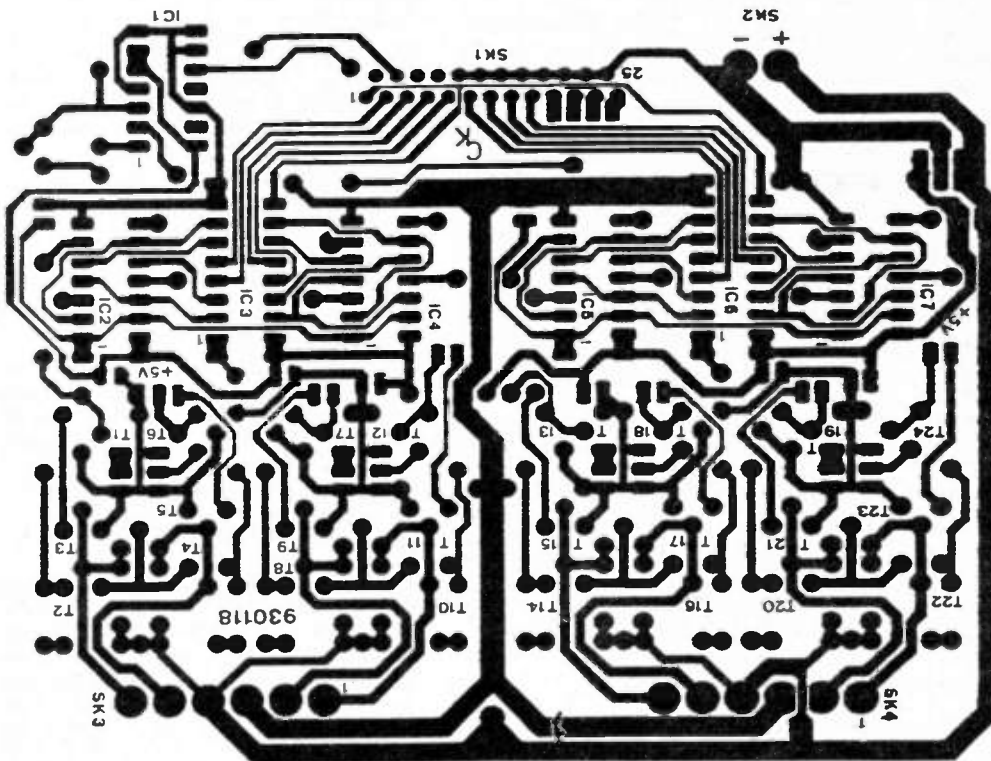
P.C.B. Layout and wiring for the Dual Stepping Motor Driver.
